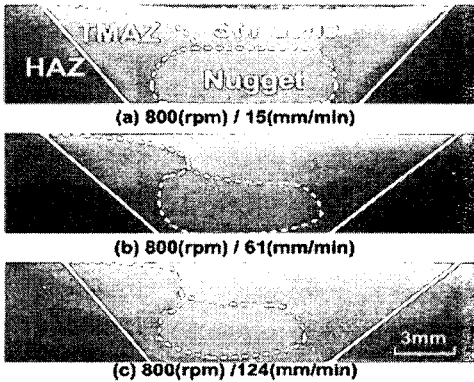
Macrostructure of cross-section welded by half screw type tool at the conditions of 15, 61 and 124mm/min with 800rpm
